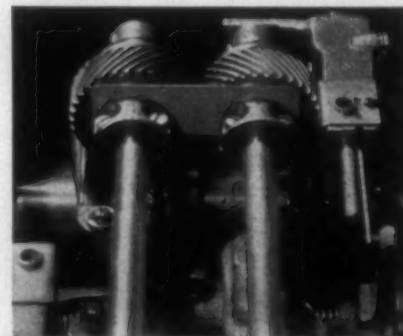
Clutch Collar Adjusting Gauge, 90-1876
